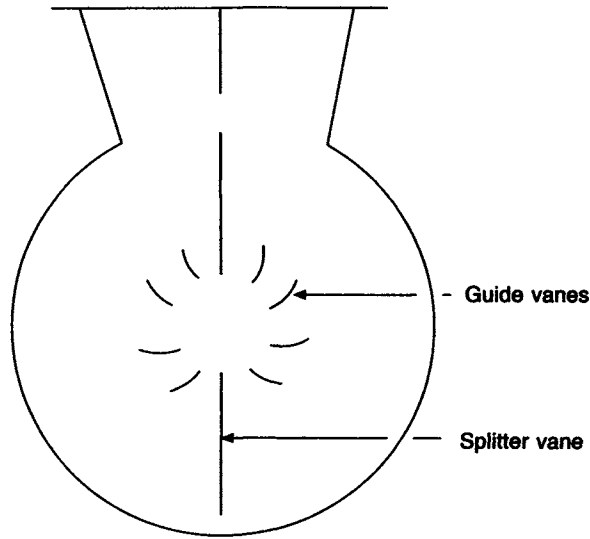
Multi-stage compressor inlet showing splitter vanes and guide vanes.
